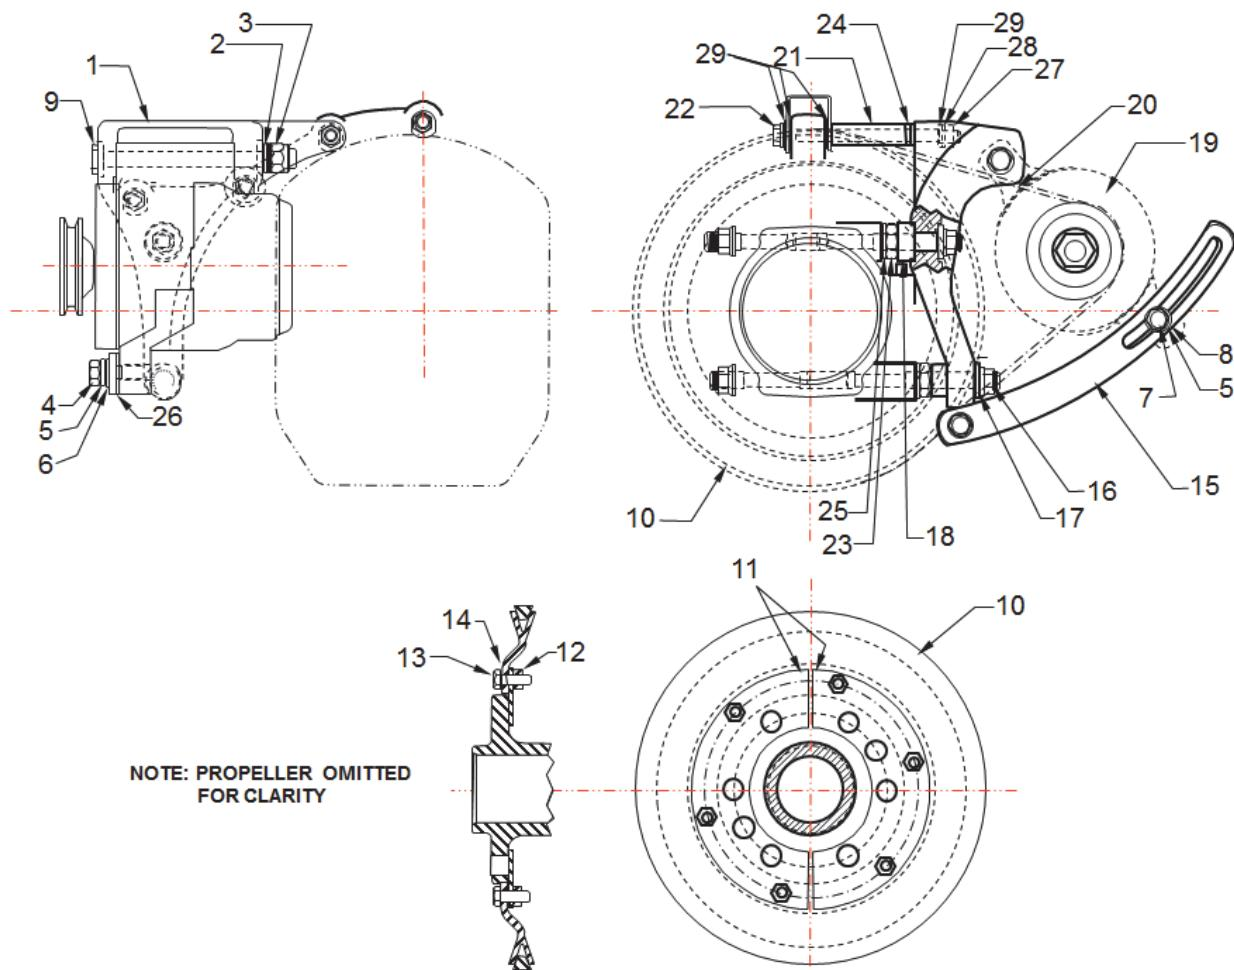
85 Amp Belt Driven Alternator Assembly
